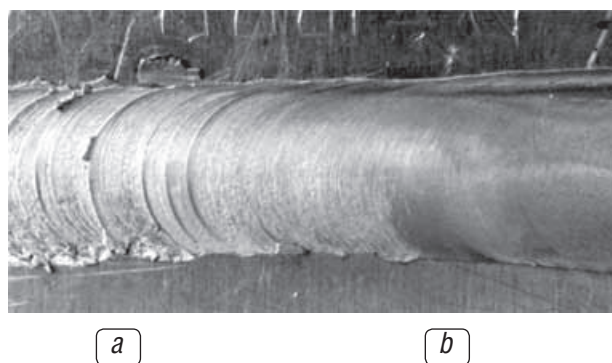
The exterior surface of the weld seam, depending on the rotation speed of the tool: a — $v=800$ rpm; b — $v=1600$ rpm
